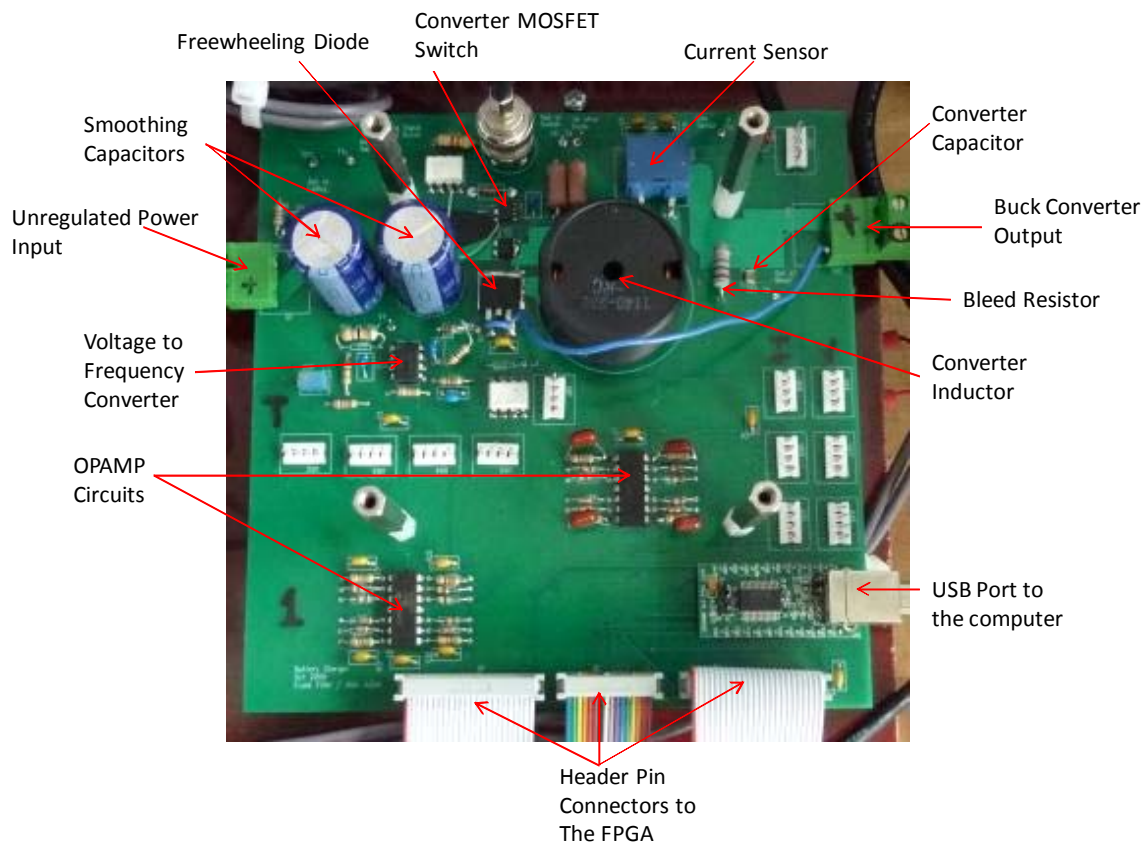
Charger Component PCB with the Charger and Signals Section Completed.
